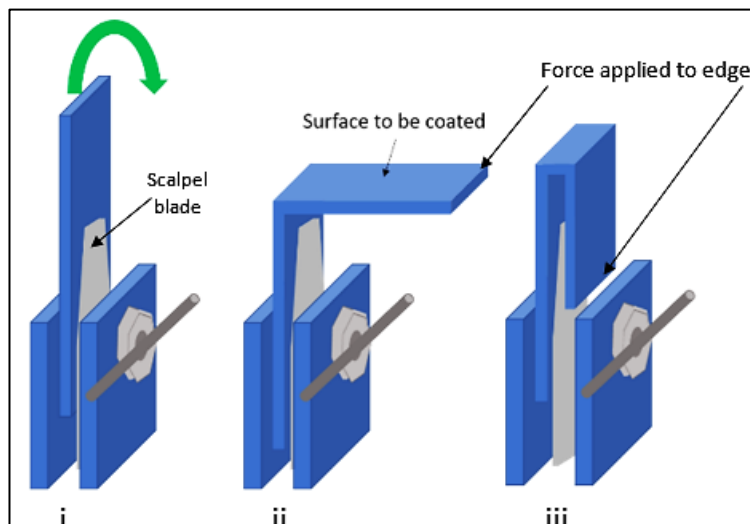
a diagram of the bending technique used. i) Initial bending position in clamp with a scalpel blade on the inner surface. ii) Shows the flange being bent around the scalpel blade and iii) shows the flange in its final position.
